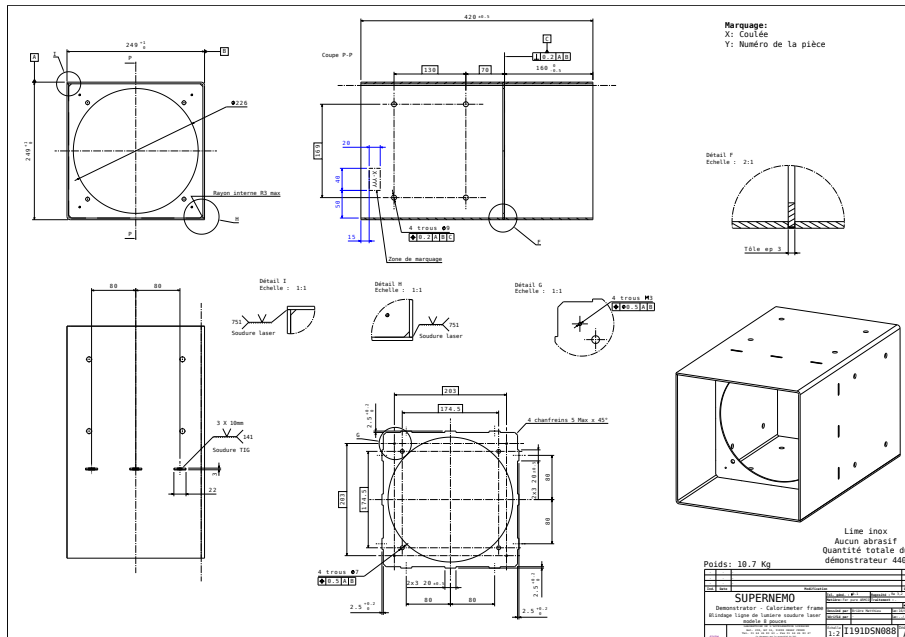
Mechanical design of a magnetic shielding for 8" optical modules. A shielding has a 249 mm side and a 420 mm length.
